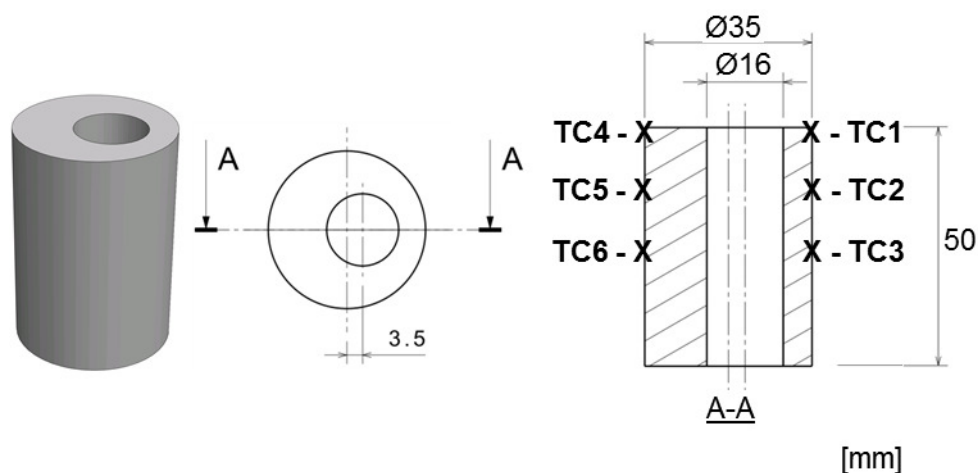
Shape of the investigated specimen with dimensions in mm and location of the thermocouples on the specimen surface.
